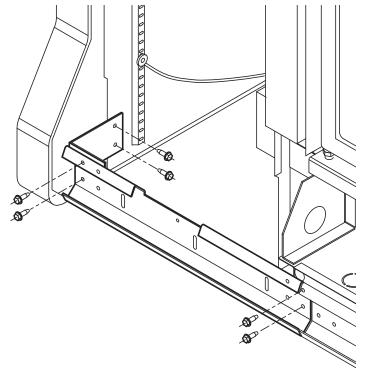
Install Bumper Retainer (Dry Goods and Dry Goods With Bump Out)
